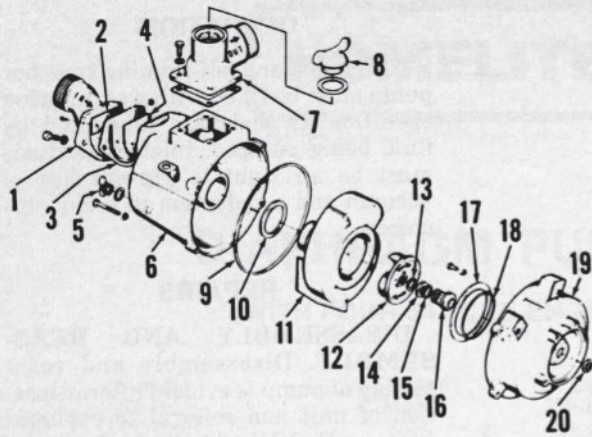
Exploded view of model 45TP3-1, 117TP3-1 or 120TP3-1 trash pump.
